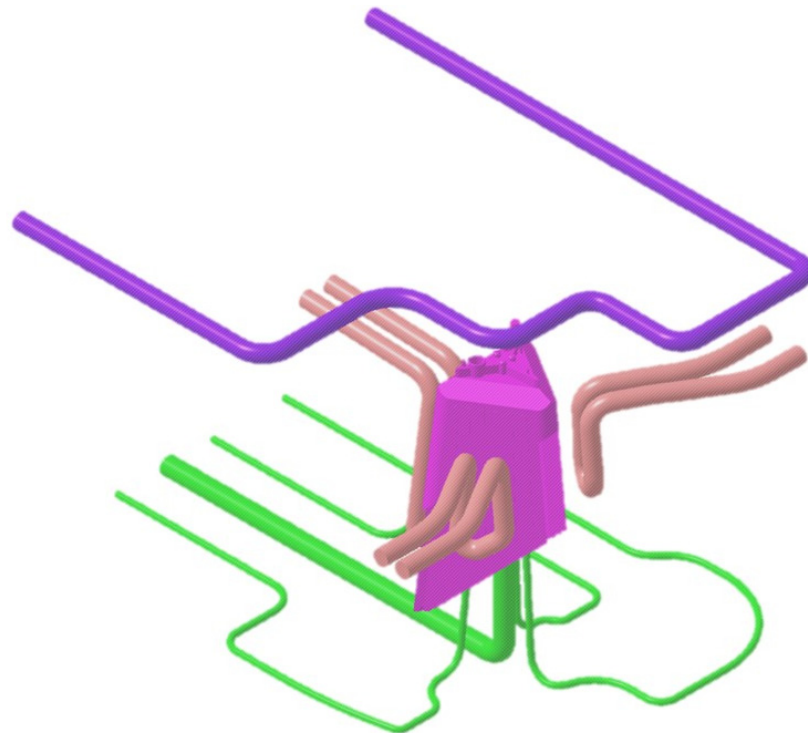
Complete cooling of the cavity, core and sliders of the injection mold for the presented optical part.
